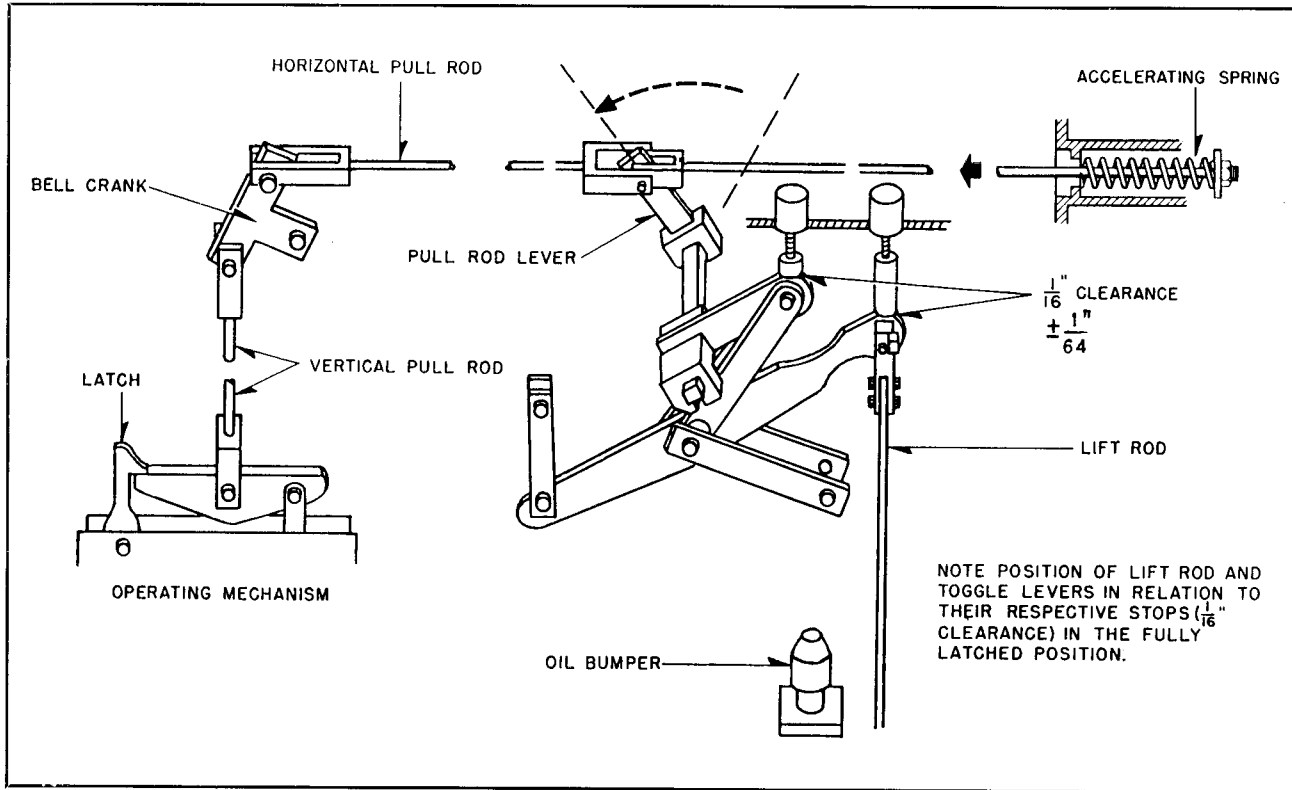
Opening Stroke of Pole Unit Lever Mechanism
